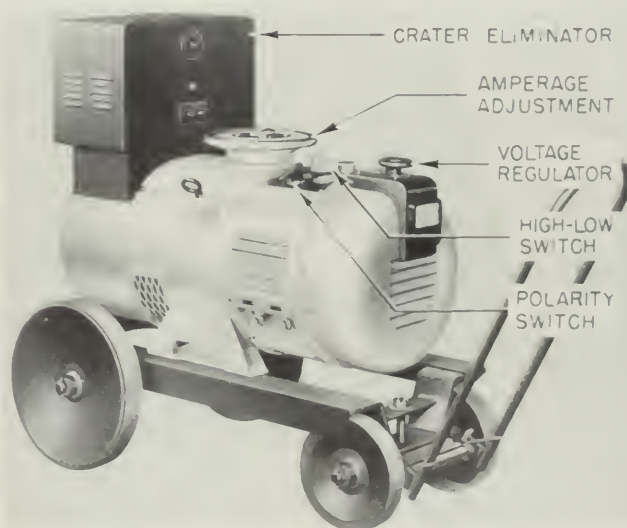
Arc Welding Generator With Crater Eliminator
